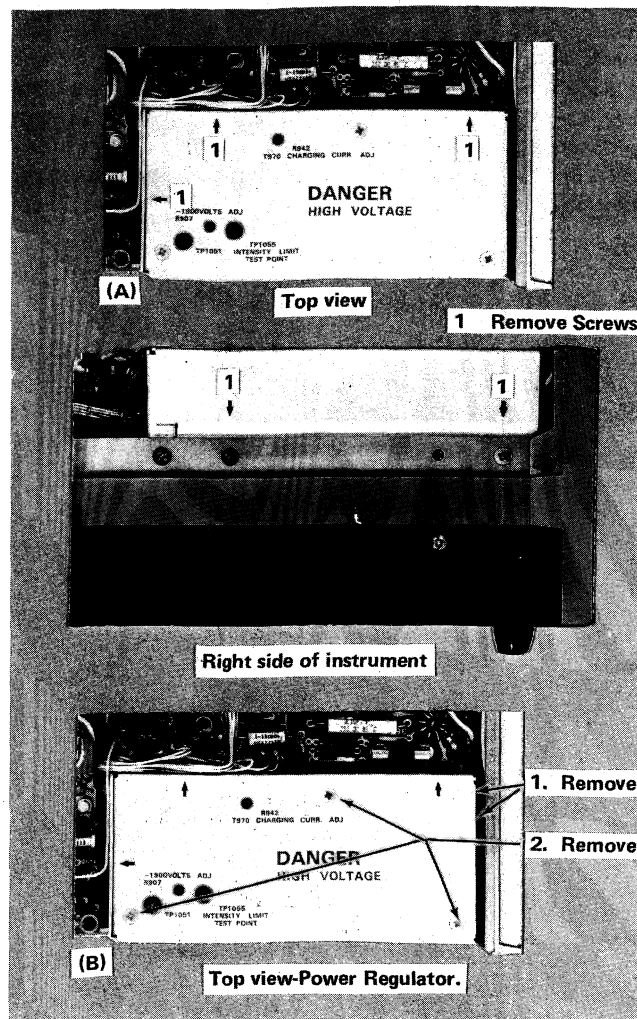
Removing (A) Power Regulator and (B) Regulator cover.
